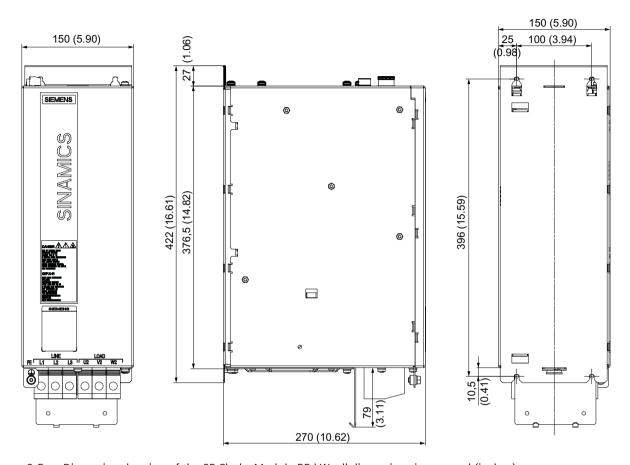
Dimension drawing of the SF Choke Module 55 kW, all dimensions in mm and (inches)
